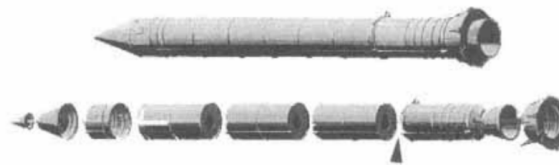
Solid rocket booster assembly. The arrow shows the Challenger point of failure. Source: [7, page 139]
